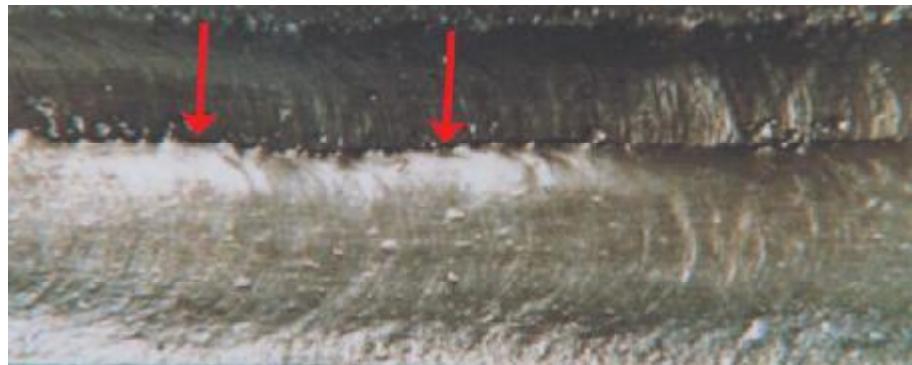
Incomplete Fusion Between Weld Beads
